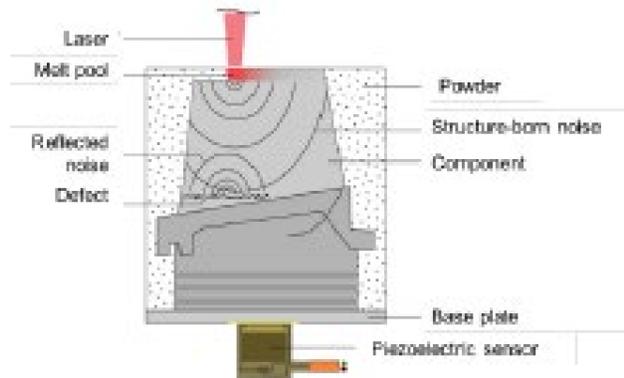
A single PZT sensor fixed to the back of the working plate. From [9]
